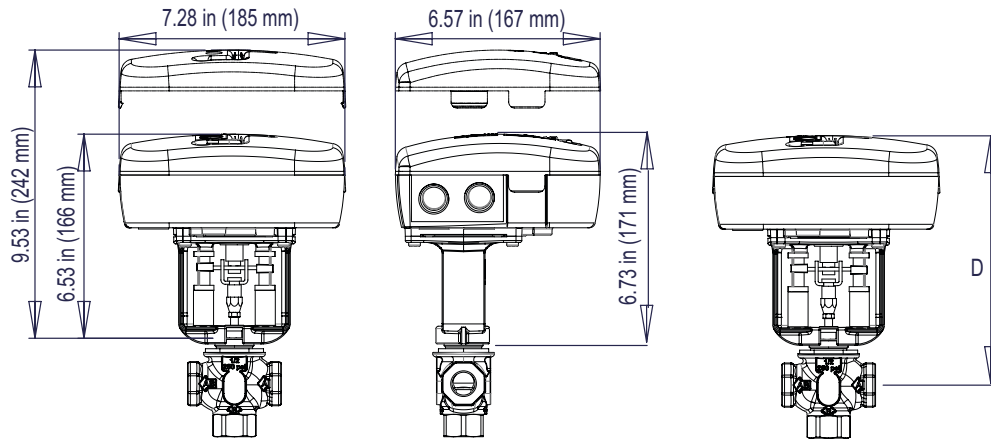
Forta M900Axx-VB Style Dimensions<sup>a</sup>
